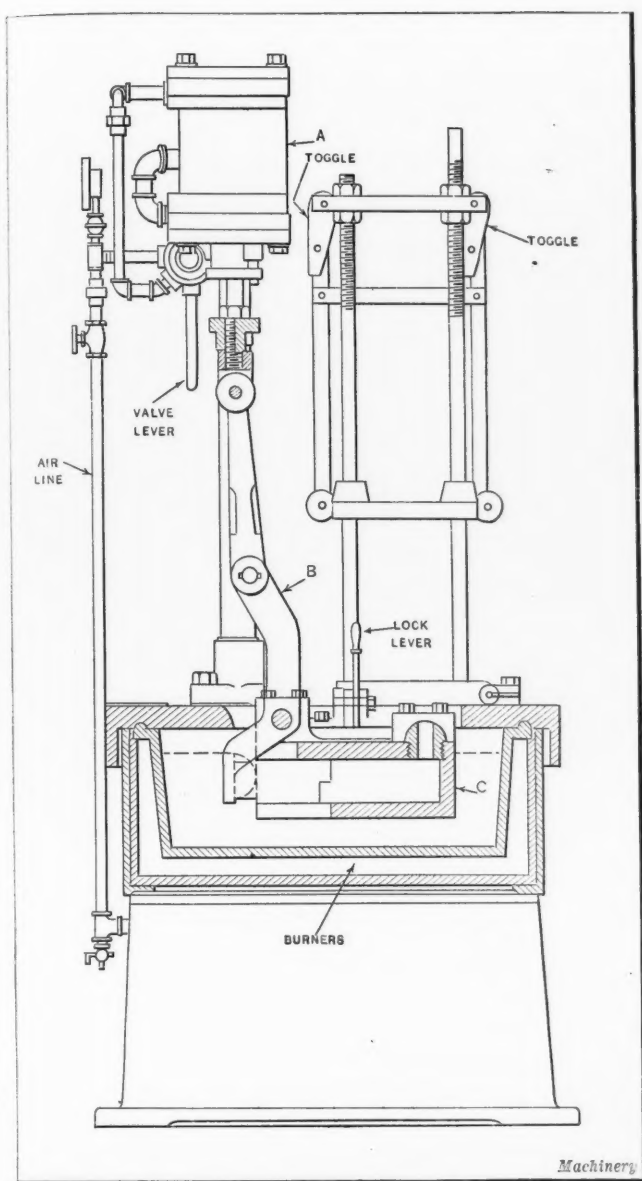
Diagram of Plunger-type Die-casting Machine, with Die Carriage in Vertical Position
